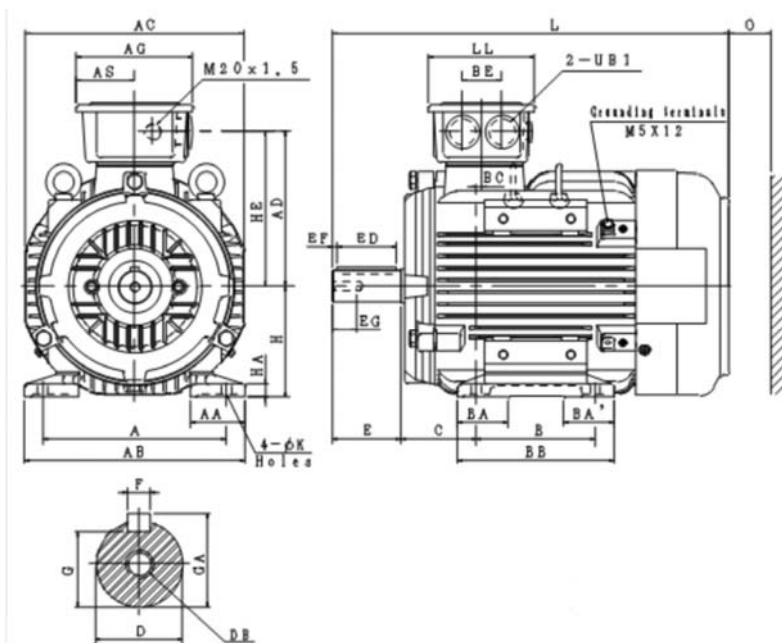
Outline drawing of cast iron design, feet version, mounting B3; frame size 132
